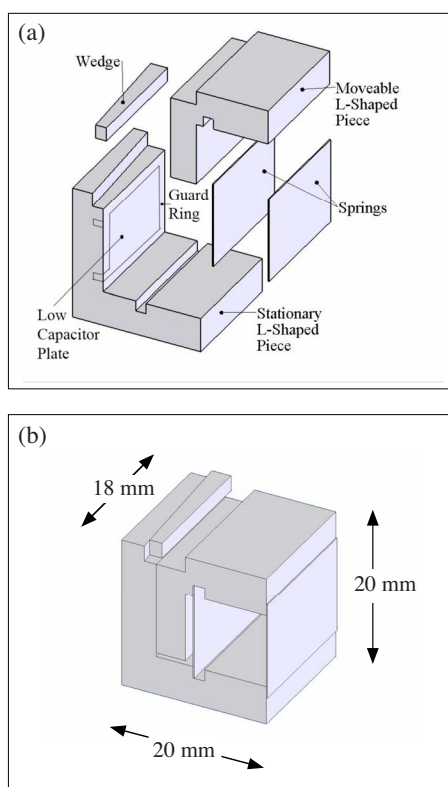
(Color online) (a) Exploded view of the fused quartz dilatometer cell. (b) Assembled view of the cell.
